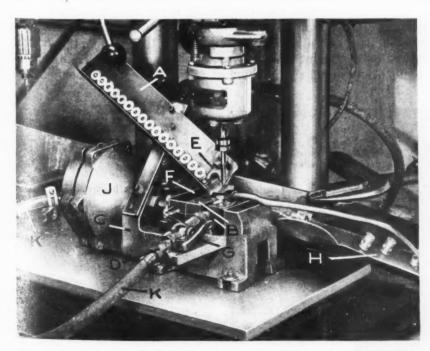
Set-up for Automatically Feeding Small Cylindrical Parts into a Tapping Fixture and Ejecting them when the Operation Has Been Completed
